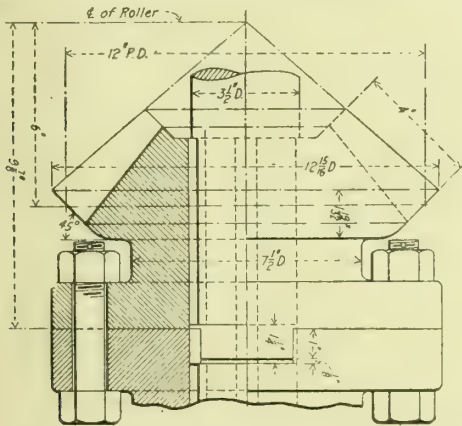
HALF COUPLING WITH MITRE GEAR. NO. 1 MILL FURNACE RUN; 0.12 PER CENT. CARBON STEEL; CASE CARBONISED ON FACE AND IN BORE AND KEYWAYS. PENETRATION, ¼IN.
